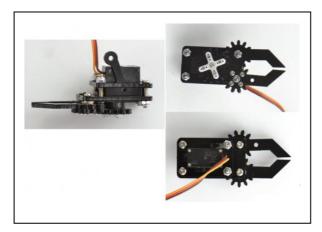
The gripper after assembly. (This isn't the Endeavour's chassis, but a similar one.)
